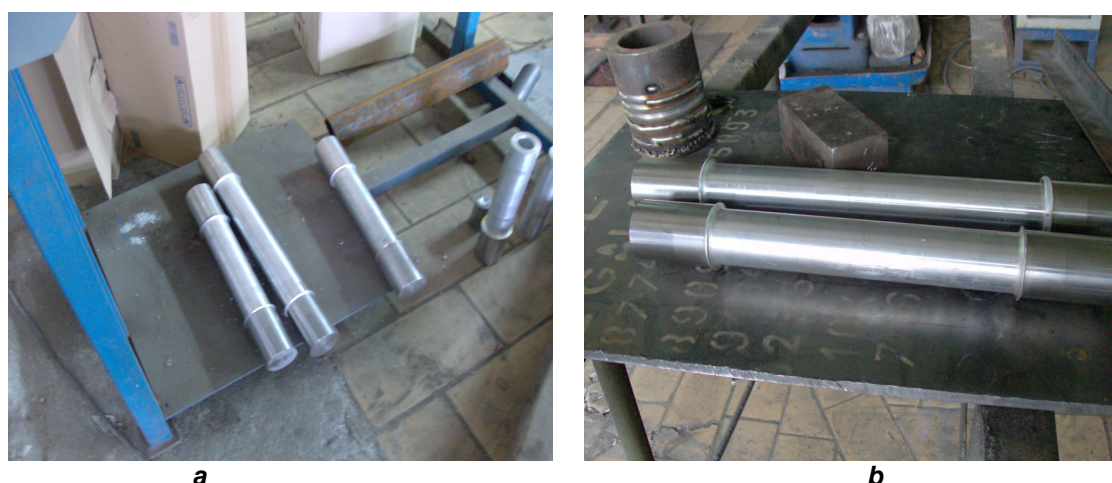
Friction welded samples: a – alloy of 6060 aluminum with 1.4305 stainless steel; b - St37 steel with 1.4305 stainless steel.
